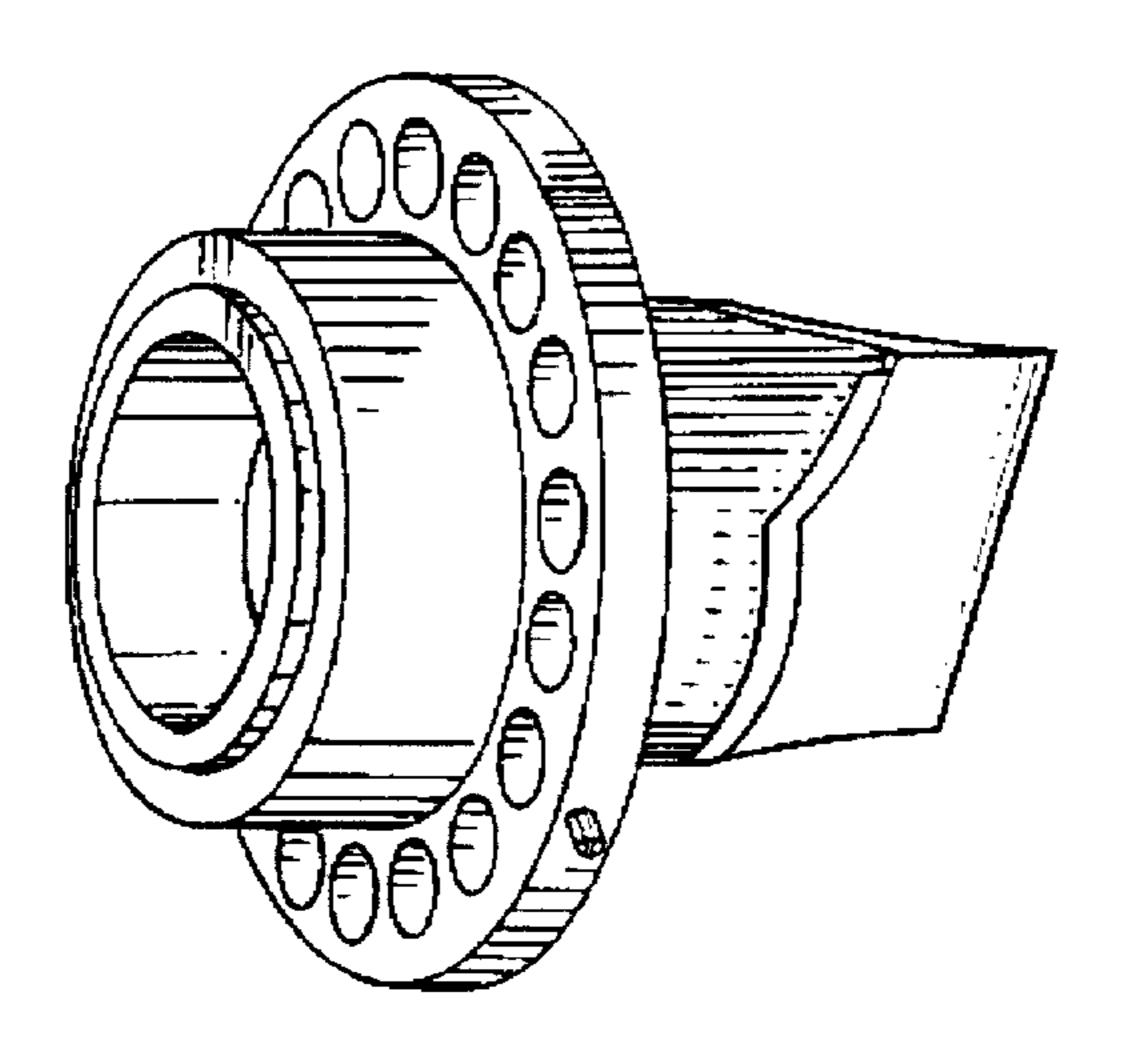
is a perspective view for another embodiment of the tube sealing system of the present invention;
